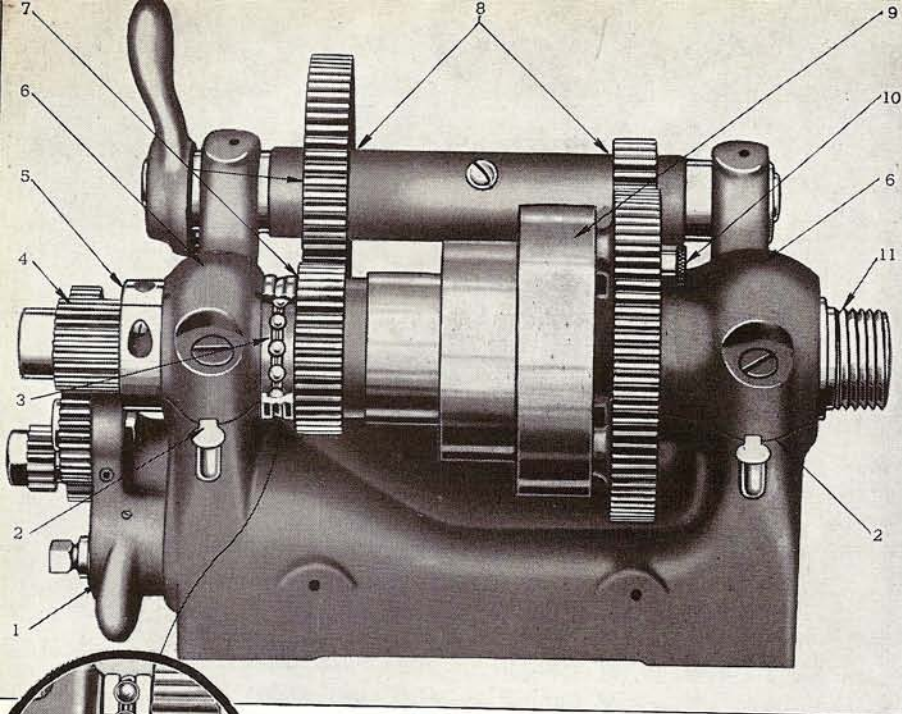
"Workshop" Lathe Headstock With Guards Removed.
